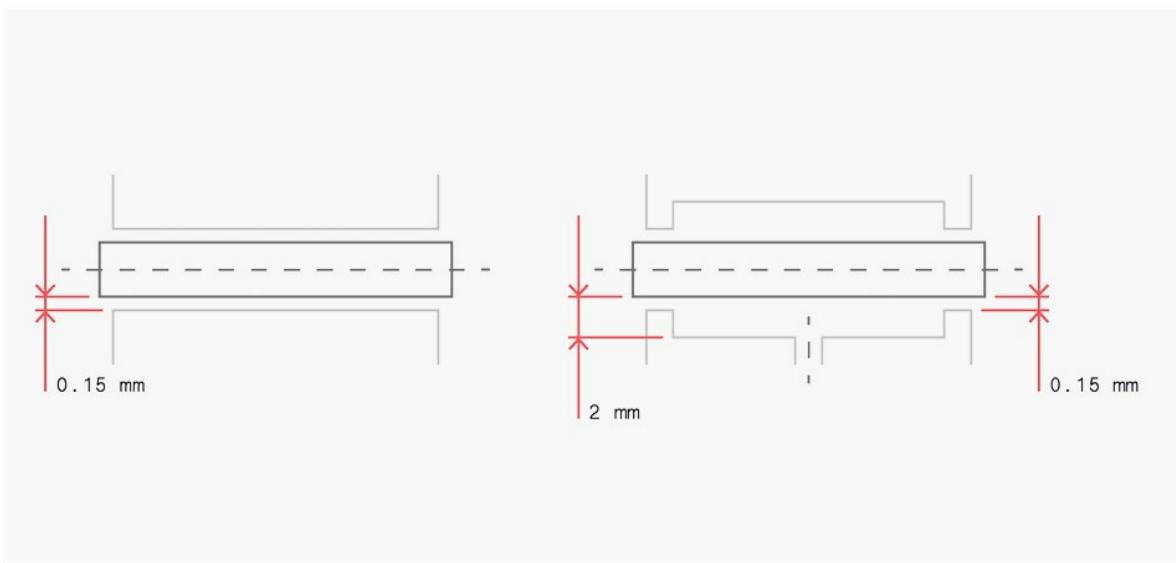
A poor powder removal design (left) and a preferred design utilizing bearing surfaces (right)
